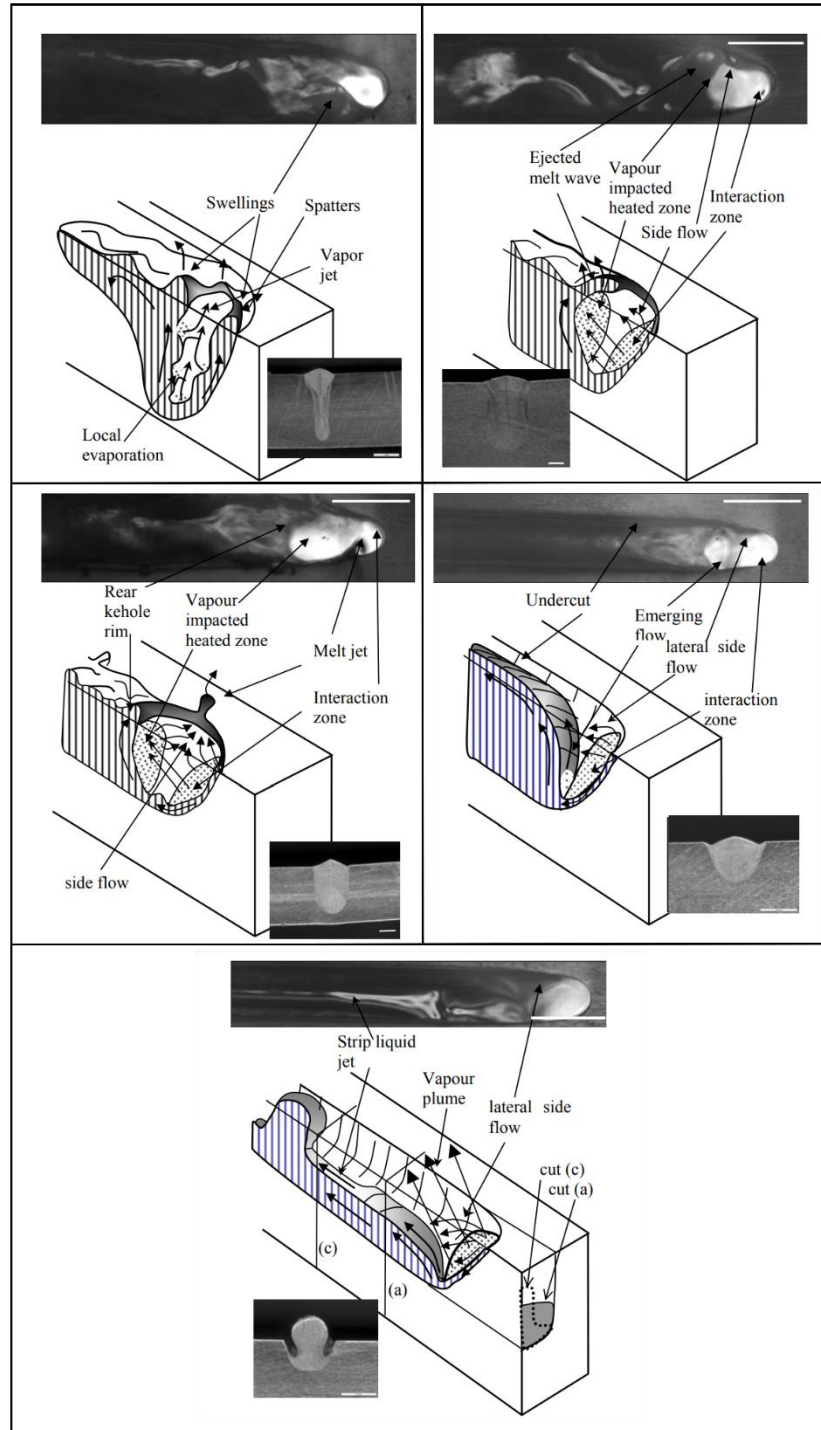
Laser welding keyhole regimes of the melt pool [95].
